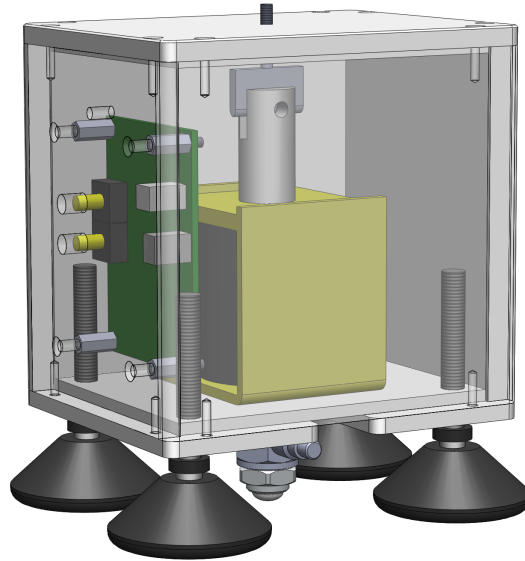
Housing design showing solenoid actuator and control circuit PCB
